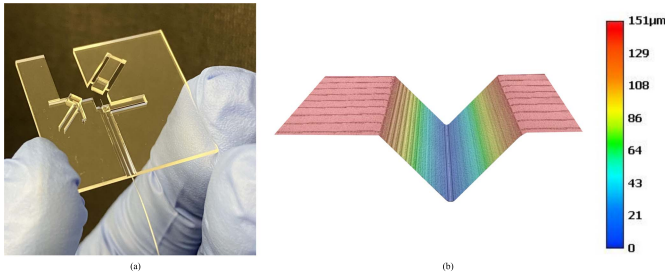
(a) Fully assembled device is shown here without the glued mirrors. (b) Height profile of the laser manufactured v-groove
